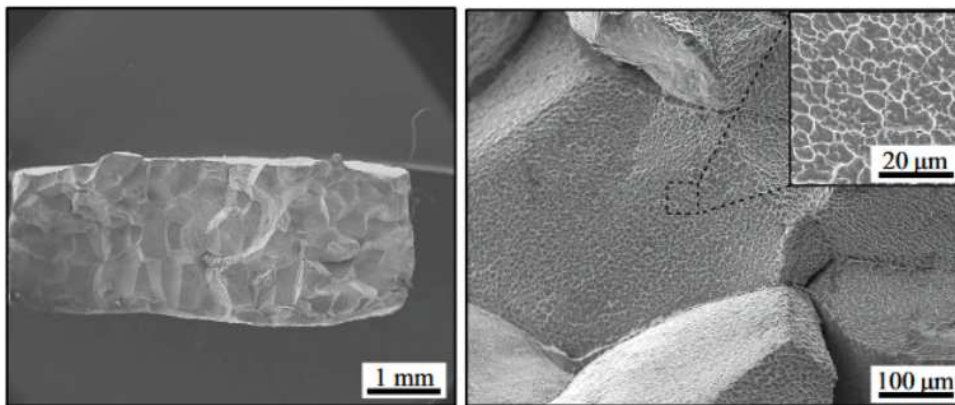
Typical fracture morphology of fracture surface of as-cast strip tensile tested at 50 °C.
